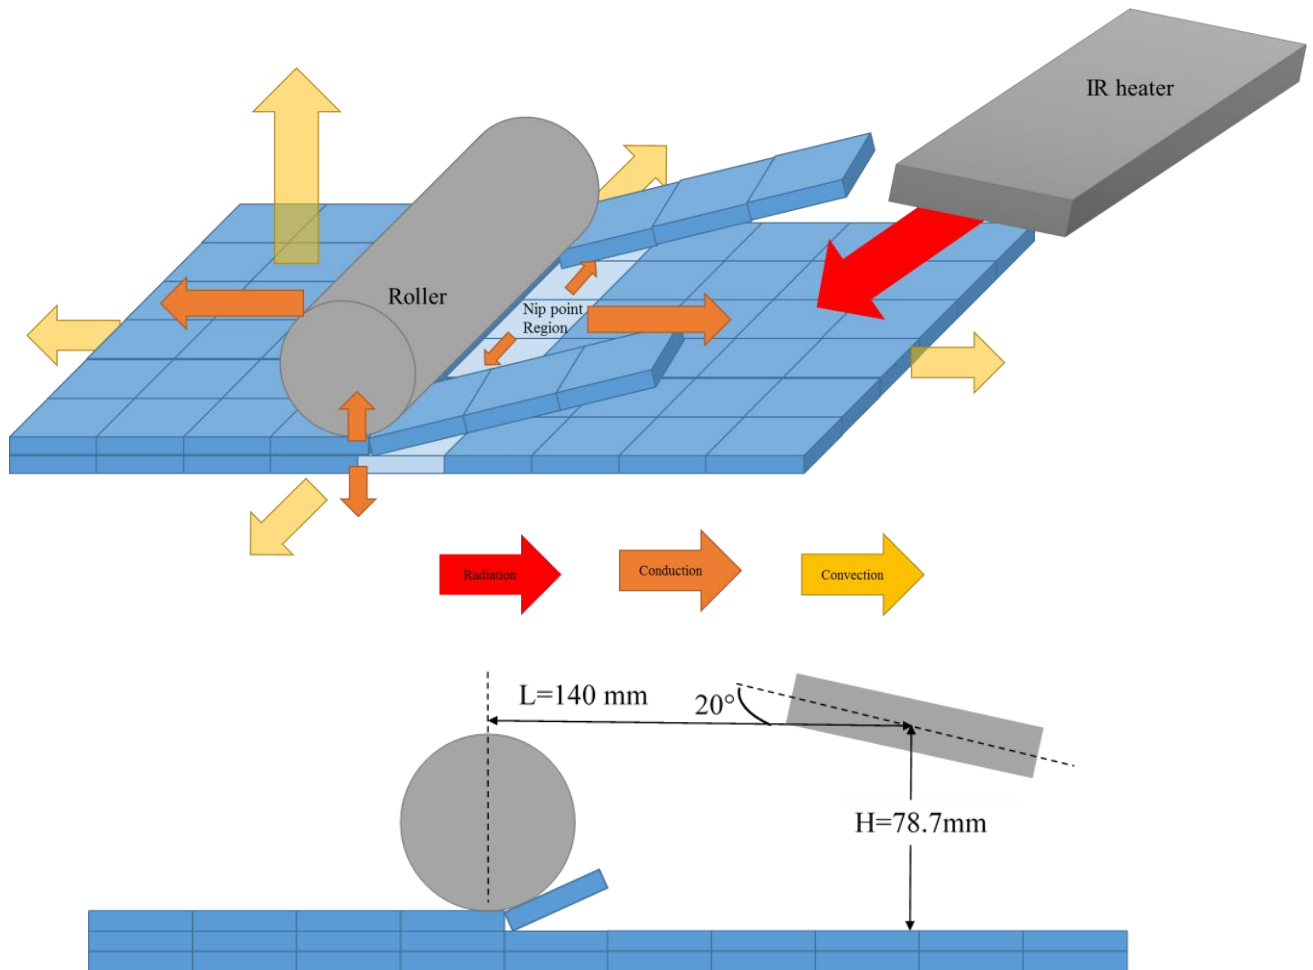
Heat transfer mechanisms (top) during automated layup process and critical dimensions in side view (bottom)
